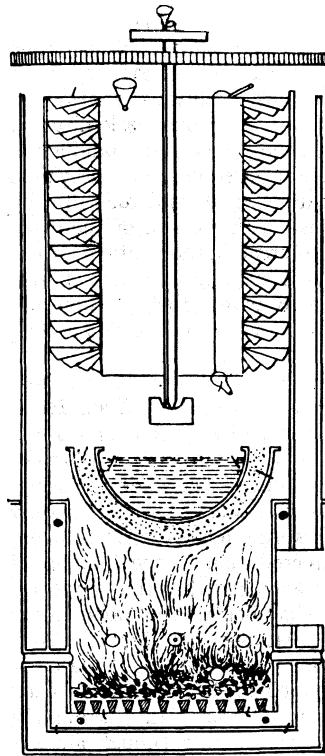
PATENT DRAWING OF JOHN DUMBELL'S TURBINE
